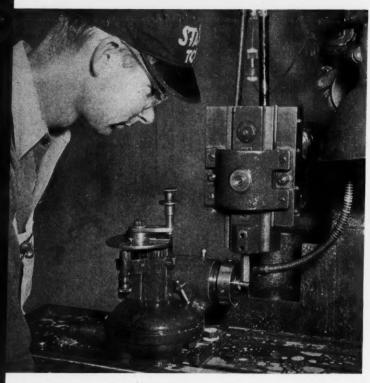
Cutting Serrations in a Carburstor Stud, using a Van Norman Miller Equipped with a Slotting Attachment
